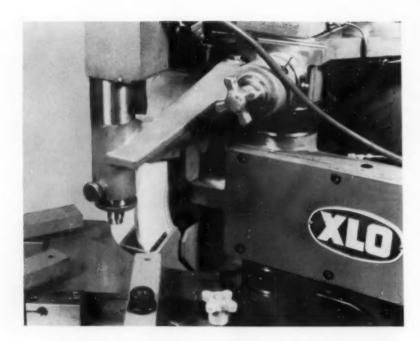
Built-in precision assists in accurate workpiece location, presented to the reciprocating wheel at an optimum angle.
